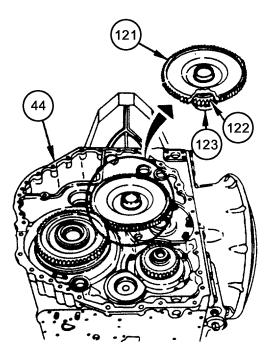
Range Input Gear, Hydrostatic Drive Gear.
